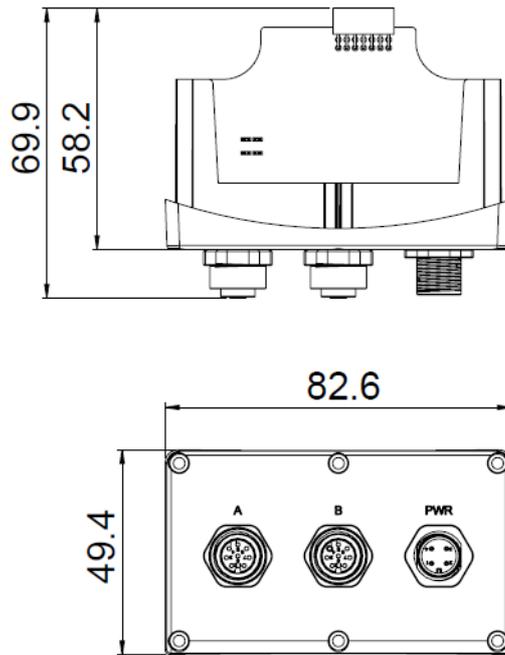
WISE-S600 Series I/O Module Dimensions
